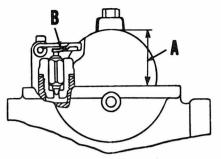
Float level (A) may be adjusted by bending tang (B).
